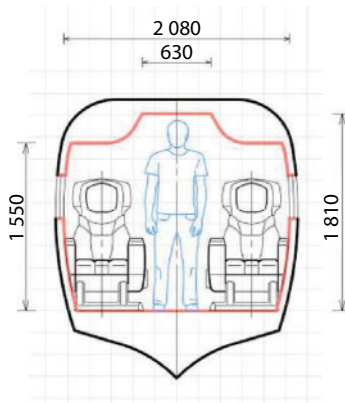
A cross-section of the cabin with the main dimensions.
